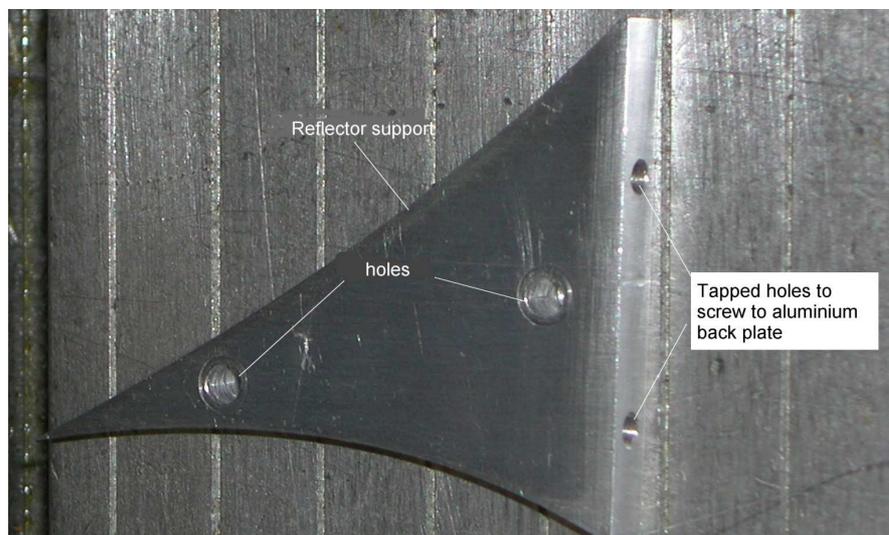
A 6-mm thick aluminium reflector support.
